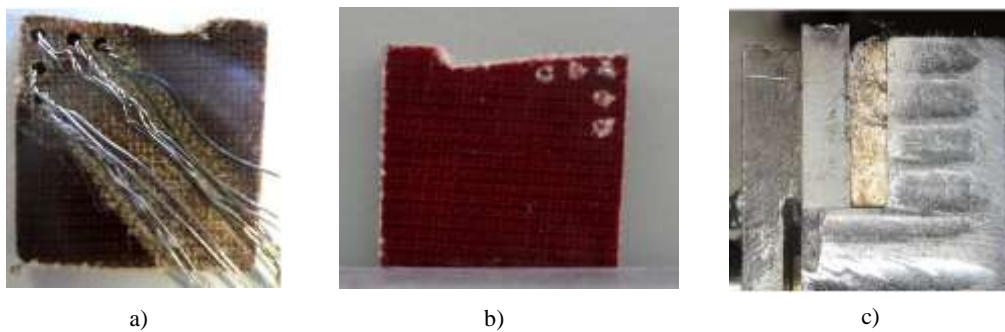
Thermocouples Attachment: a) Mounting the Tips of Thermocouples b) Placing the Tips of Thermocouples c) Assembly in the Tool Holder
